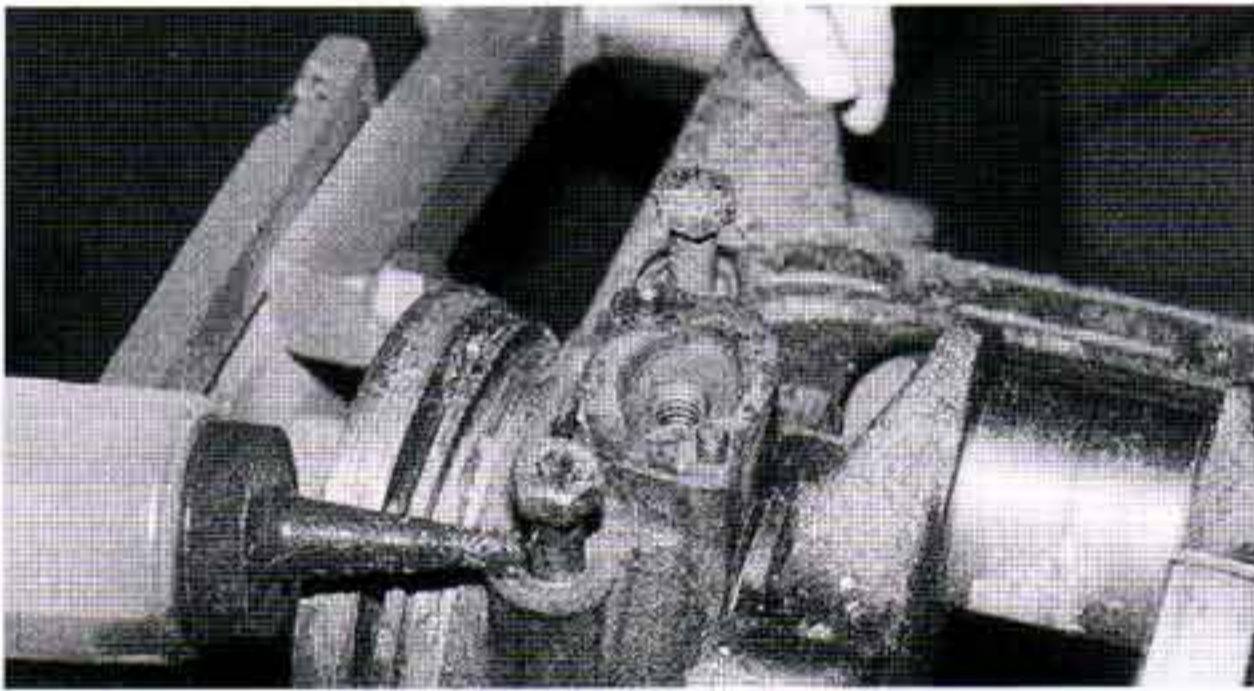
& 6b: Place the main cap back in place and torque the main cap bolts to 60 ft/lbs. Make sure to put oil on the threads and under the heads of the bolt to insure an even torque.
